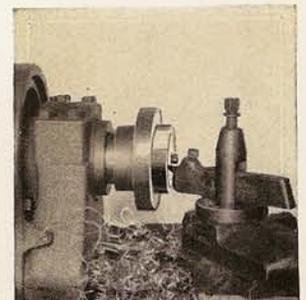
Manufacturing Steel Gear Blanks in the Lathe
